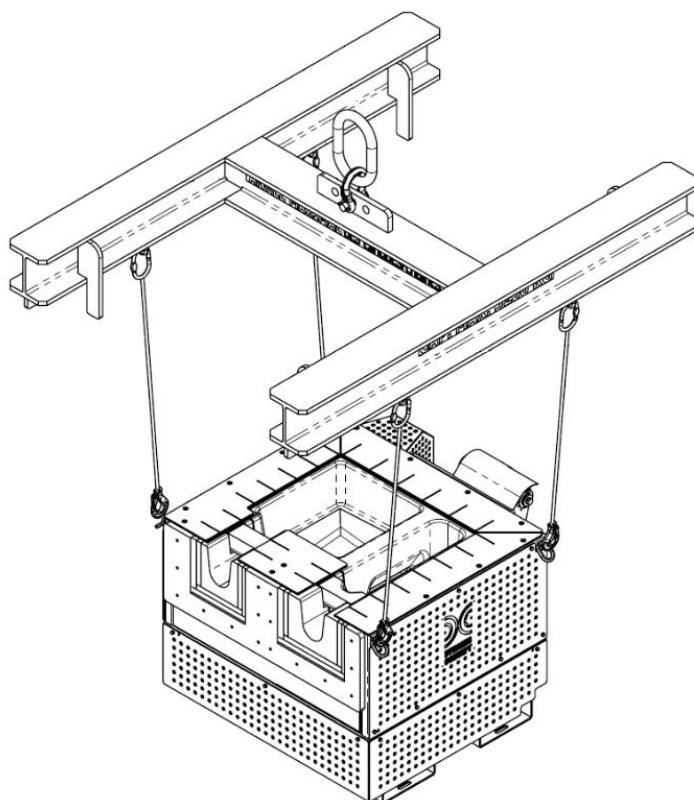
Lifting assembly for the filtering box (see drawing A00-24121-EX-2000)
